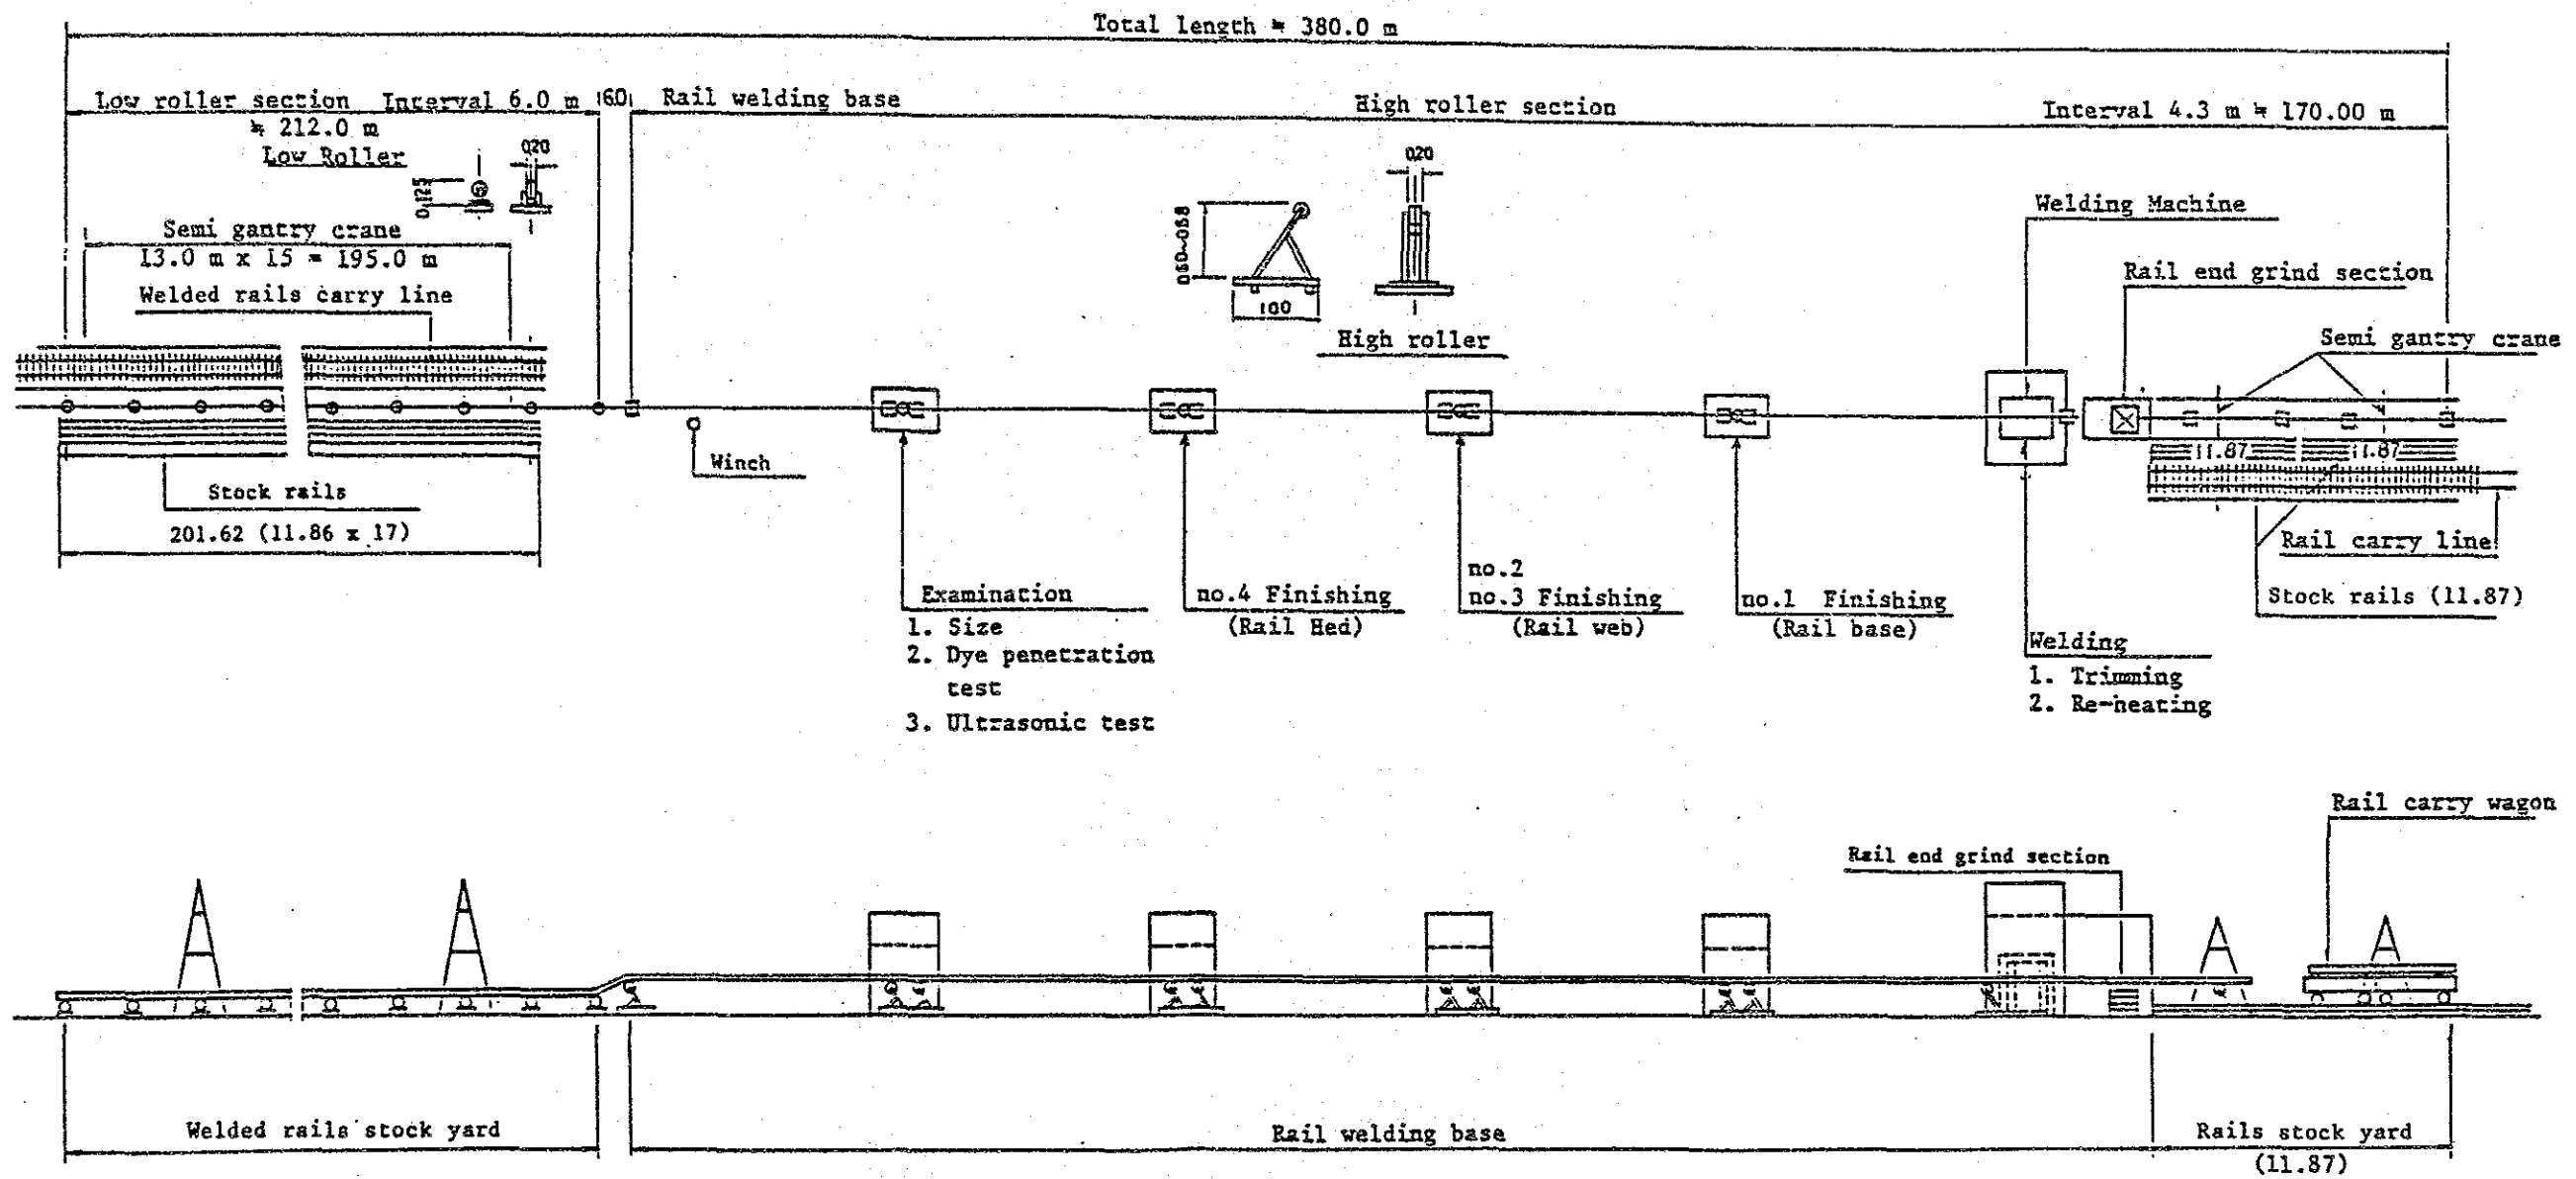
Typical Rail Welding Workshop
